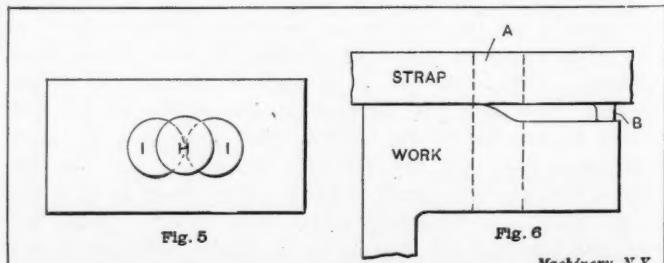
Drilling Three Holes in the Same Manner as in Fig. 4 Fig. 6. Drilling a Hole which starts on a Radius
